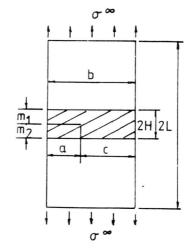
Configuration of single-edge cracked welded specimen
